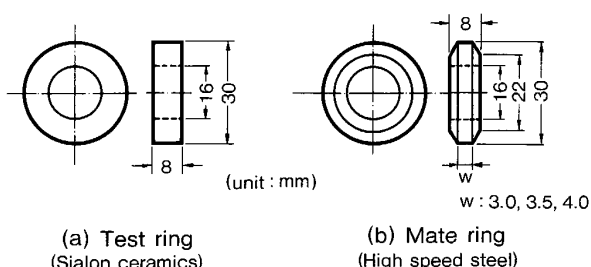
Shape and dimension of test and mate rings in rolling fatigue test.
